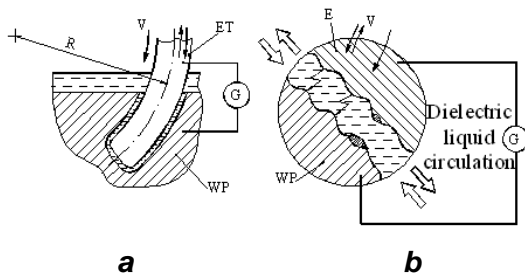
Electrical discharge machining of curvilinear axis hole (a – work principle; b – detail from the work zone)
